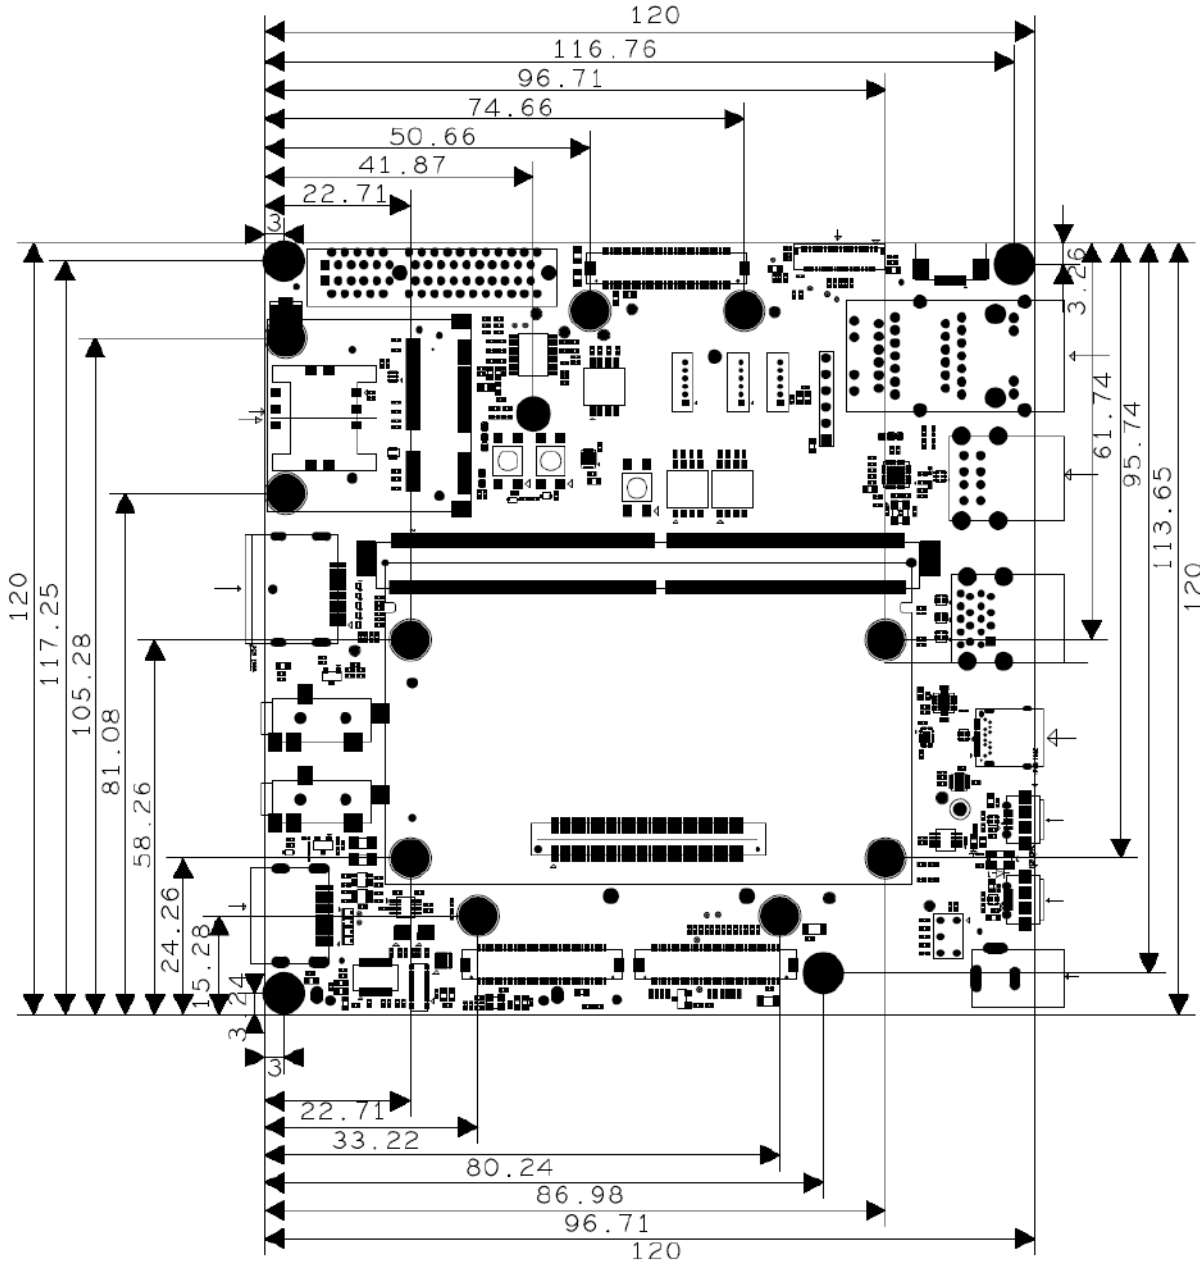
Mechanical dimensions of i.MX8 SMARC Carrier Board- Top View
